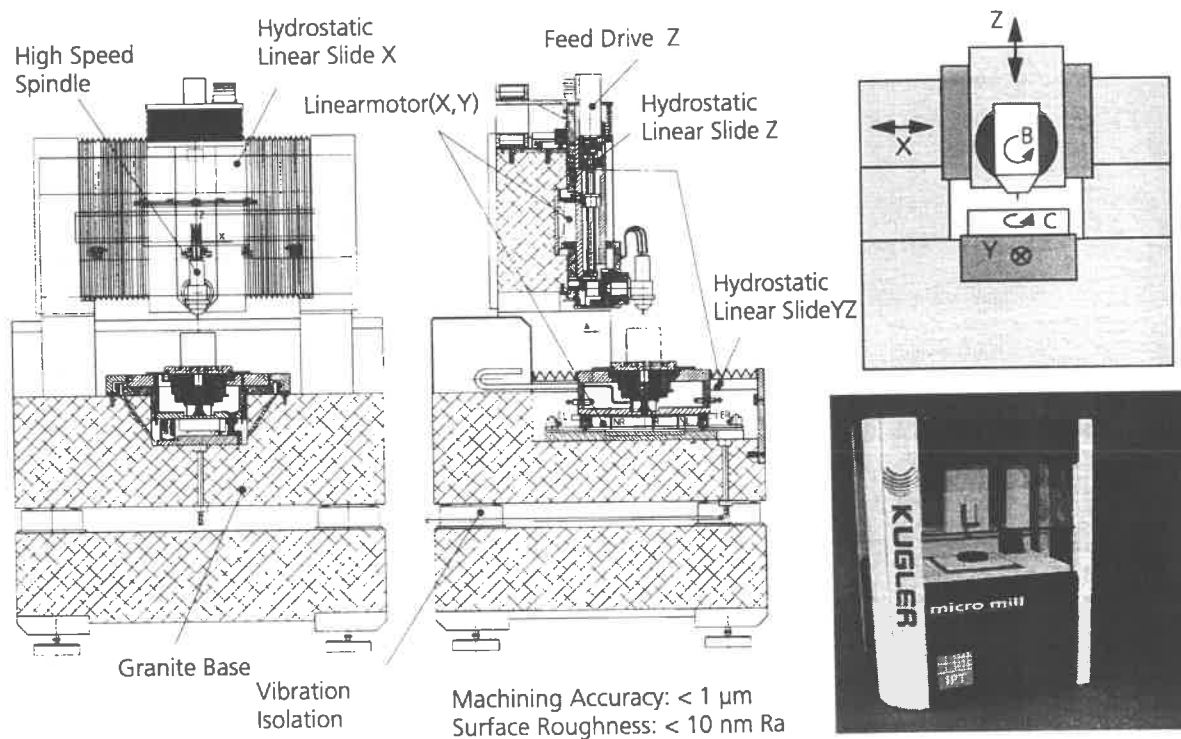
Ultraprecision Milling Machine 'Micro Mill' (Fraunhofer IPT/Kugler)
